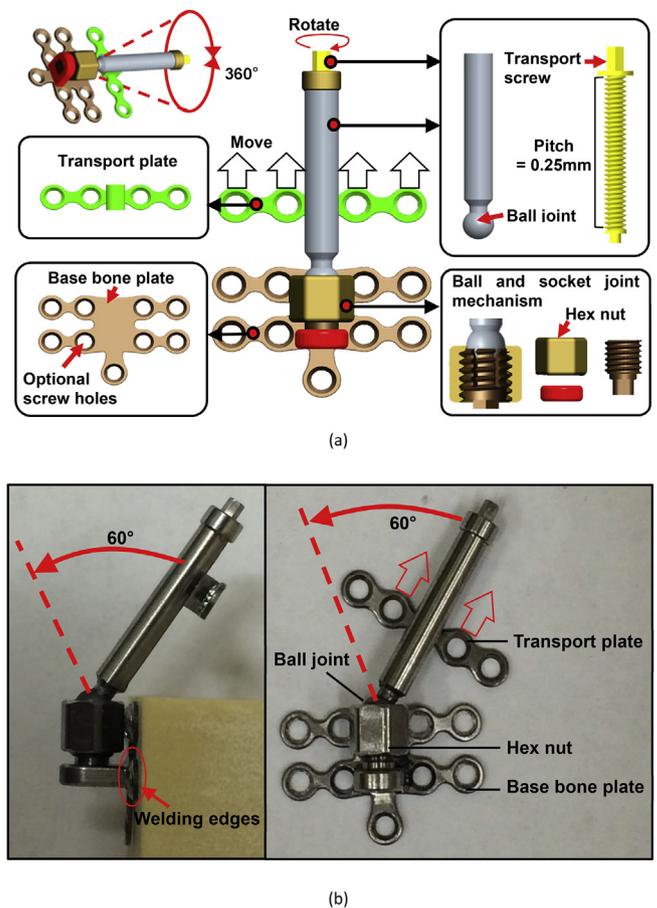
(a) Illustration of the multi-axial alveolar distractor, showing various components within the distractor, including the base bone plate, transport plate, transport screw, and ball-and-socket joint mechanism; (b) the alveolar distractor was manufactured using Ti6Al4V alloy by an ISO13485 quality management systems company.
